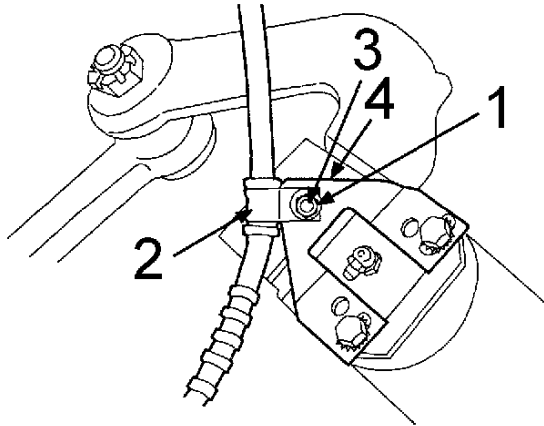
Removing Brake Line Retaining Clip from Front Axle Hose Support Bracket
